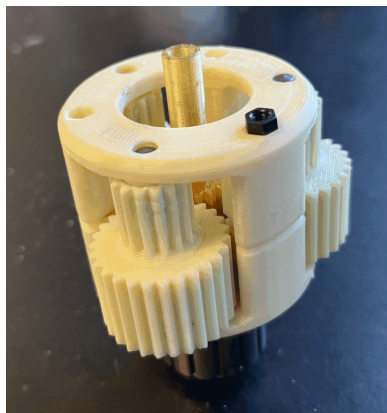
Tolerance Mismatch between Bolt and 3D Printed Planet Carrier, 2024-03-04
